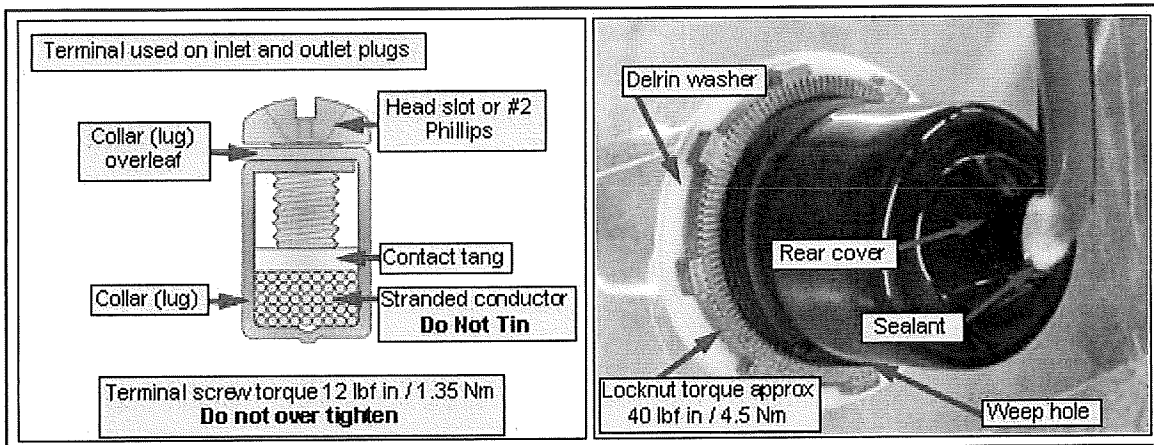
Terminal lug detail and rear view of installation. Mount weep hole down, Delrin washer between locknut and panel, rear protective cover sealed.
